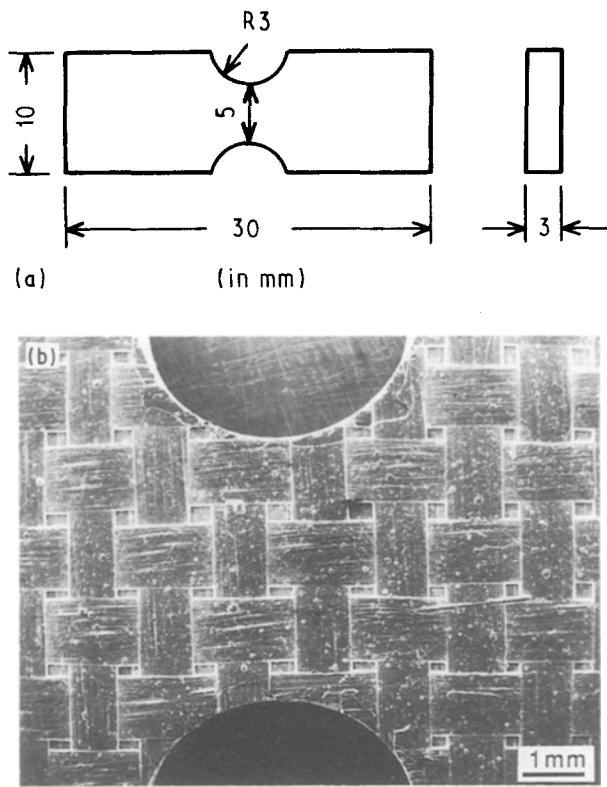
The notched specimen used for cyclic tension-tension tests showing (a) dimensions and (b) appearance.
